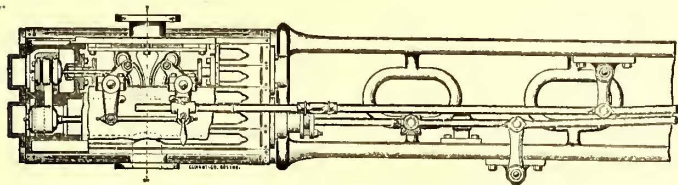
VALVE AND VALVE GEAR OF FITCHBURG ENGINE
